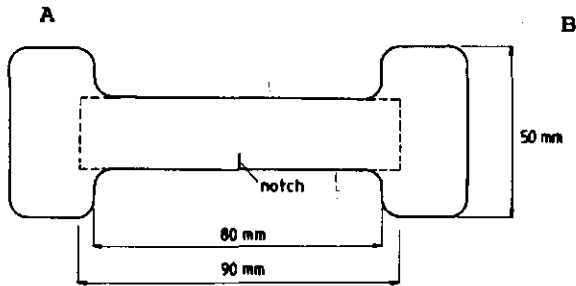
A. Shape and size of a test-piece for tensile testing.
